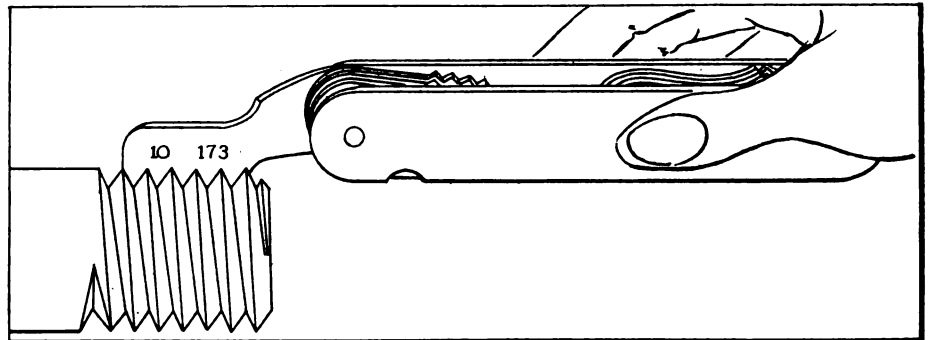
Showing the manner of measuring a threaded bolt with a pitch gauge to ascertain size and depth of thread
